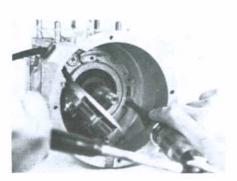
An impact screwdriver is required to loosen or tighten magneto housing screws.
